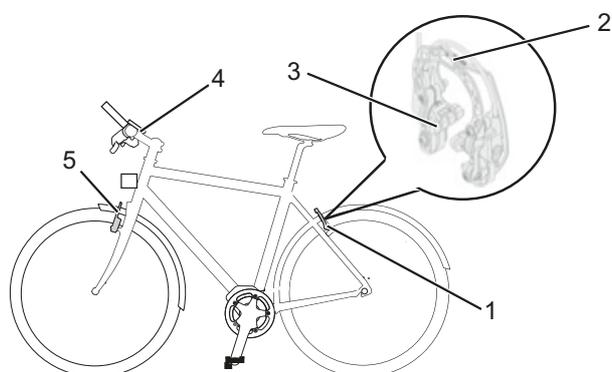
Brake system with rim brake in detail – Magura HS22 used as an example
